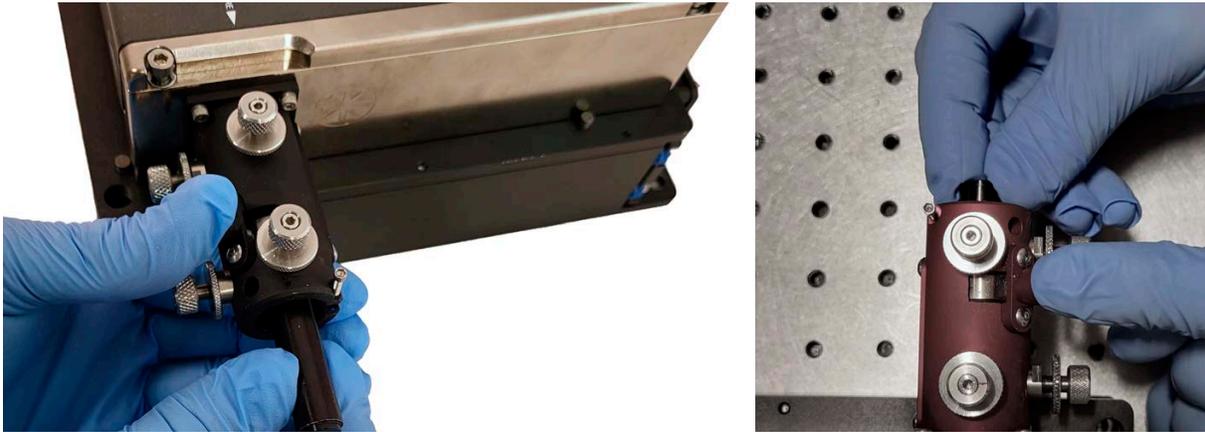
Remove/Install Lock Button and Tool Partially Inserted
